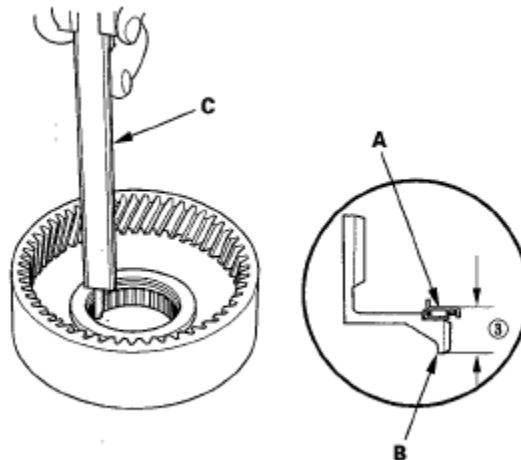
Identifying Distance Between Needle Bearing And Tapper Roller Bearing Contact Area Of Ring Gear
